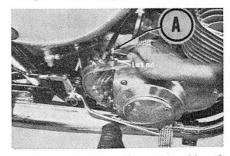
"Posi-Force" control cable adjuster is shown.
